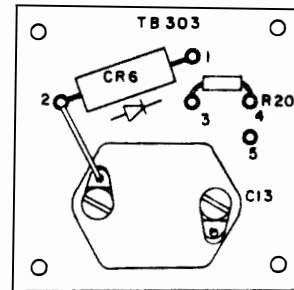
Terminal Board 1500V Assy Wired TB-303
